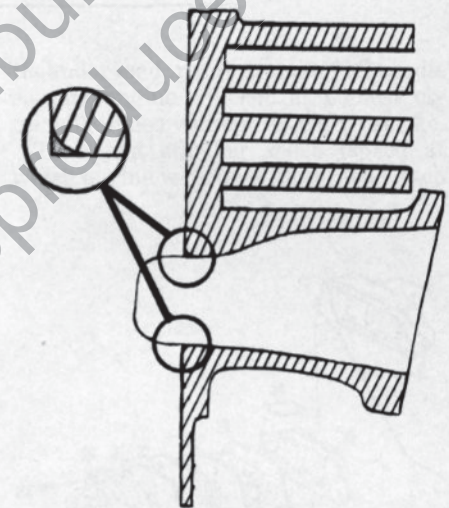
Some manufacturers recommend that edges of ports be chamfered as shown in insert, after reboring.
